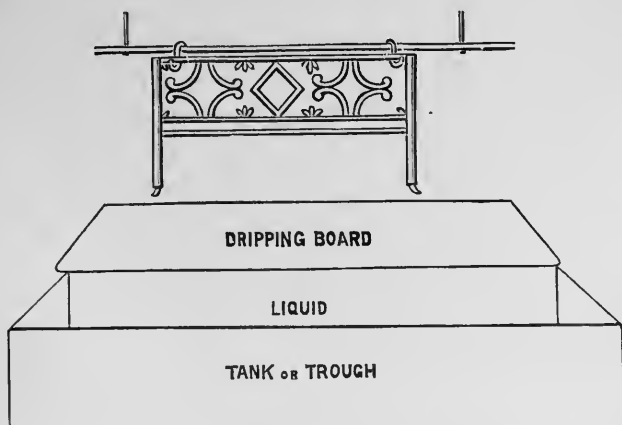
Trough for Dipping Bedstead Frames and other Large Work.
